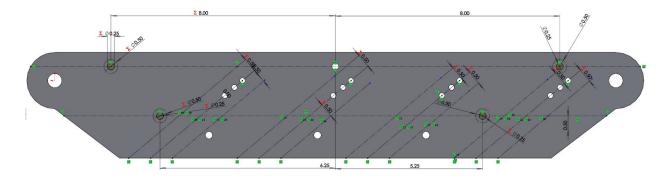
Sketch used to verify mounting hole placements, so that spacers did not interfere with the suspension shocks.
